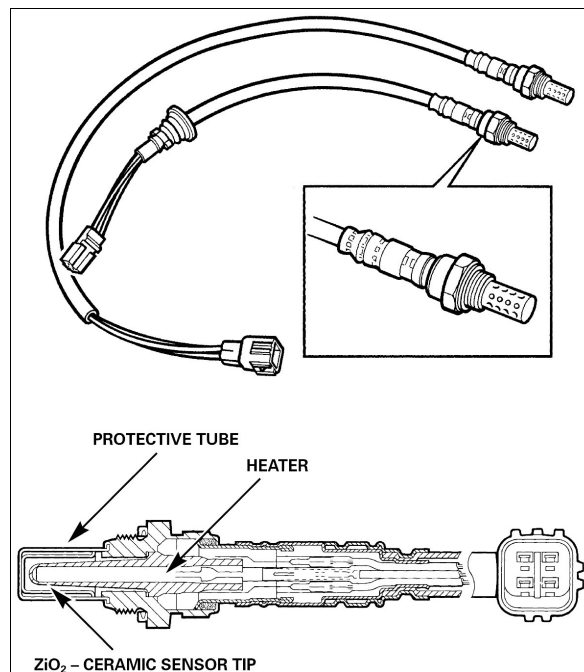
TYPICAL HEATED OXYGEN SENSOR WITH CROSS-SECTION
